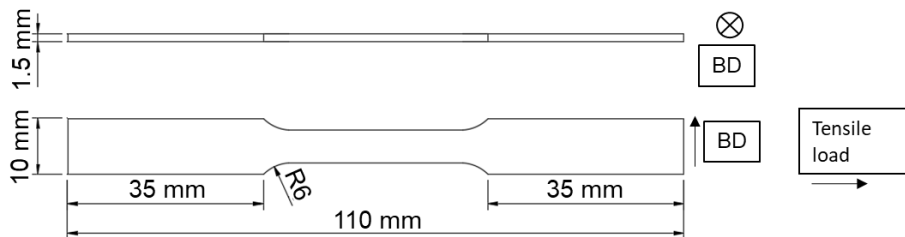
Technical drawing of the specimen designed for the in-situ characterisation and manufactured with 17-4PH. All dimensions are given in millimetres.
